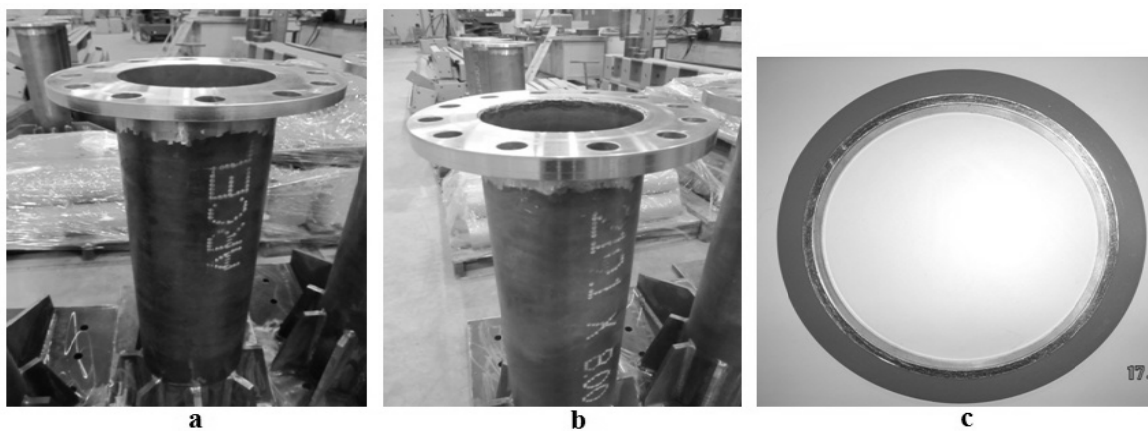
(a) Flange with 18 mm thickness (Design 01); (b) flange with 27 mm thickness (Design 02); (c) a gasket
